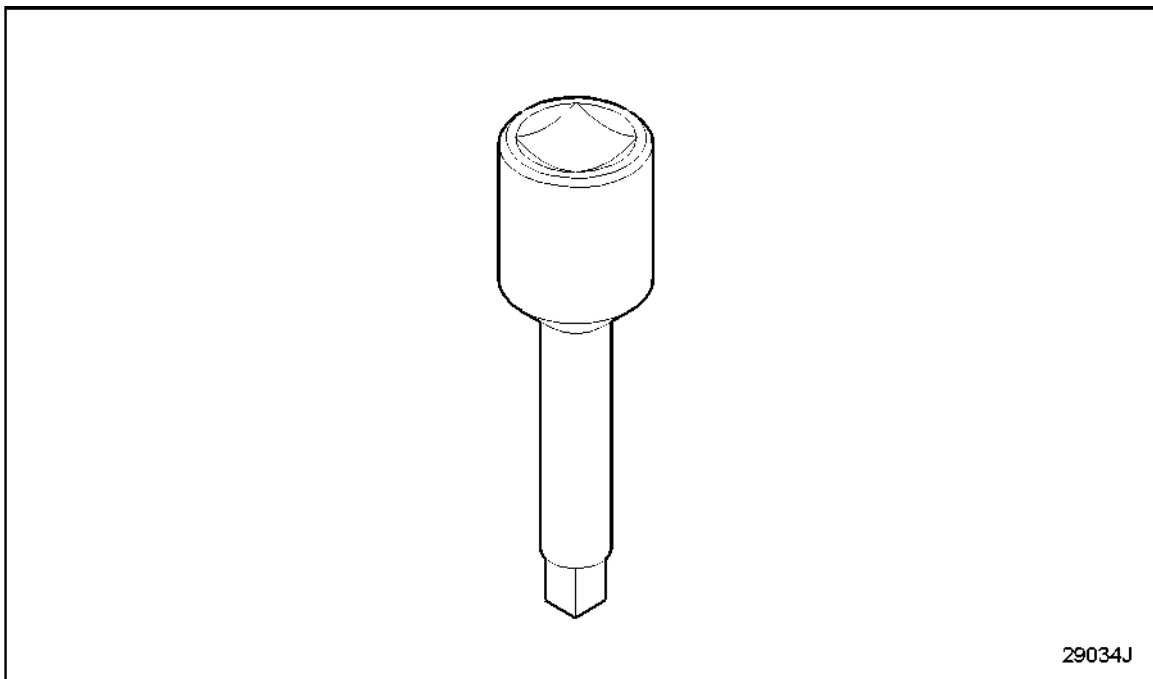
Pipe Plug Remover (SQ Drive Plug),J 34650
